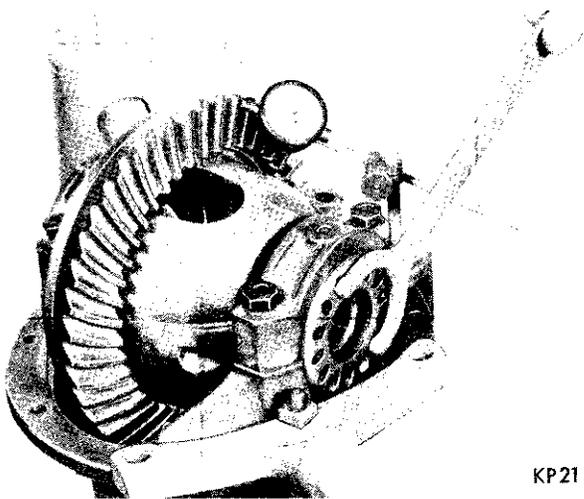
Measuring Backlash between Drive Gear and Pinion
